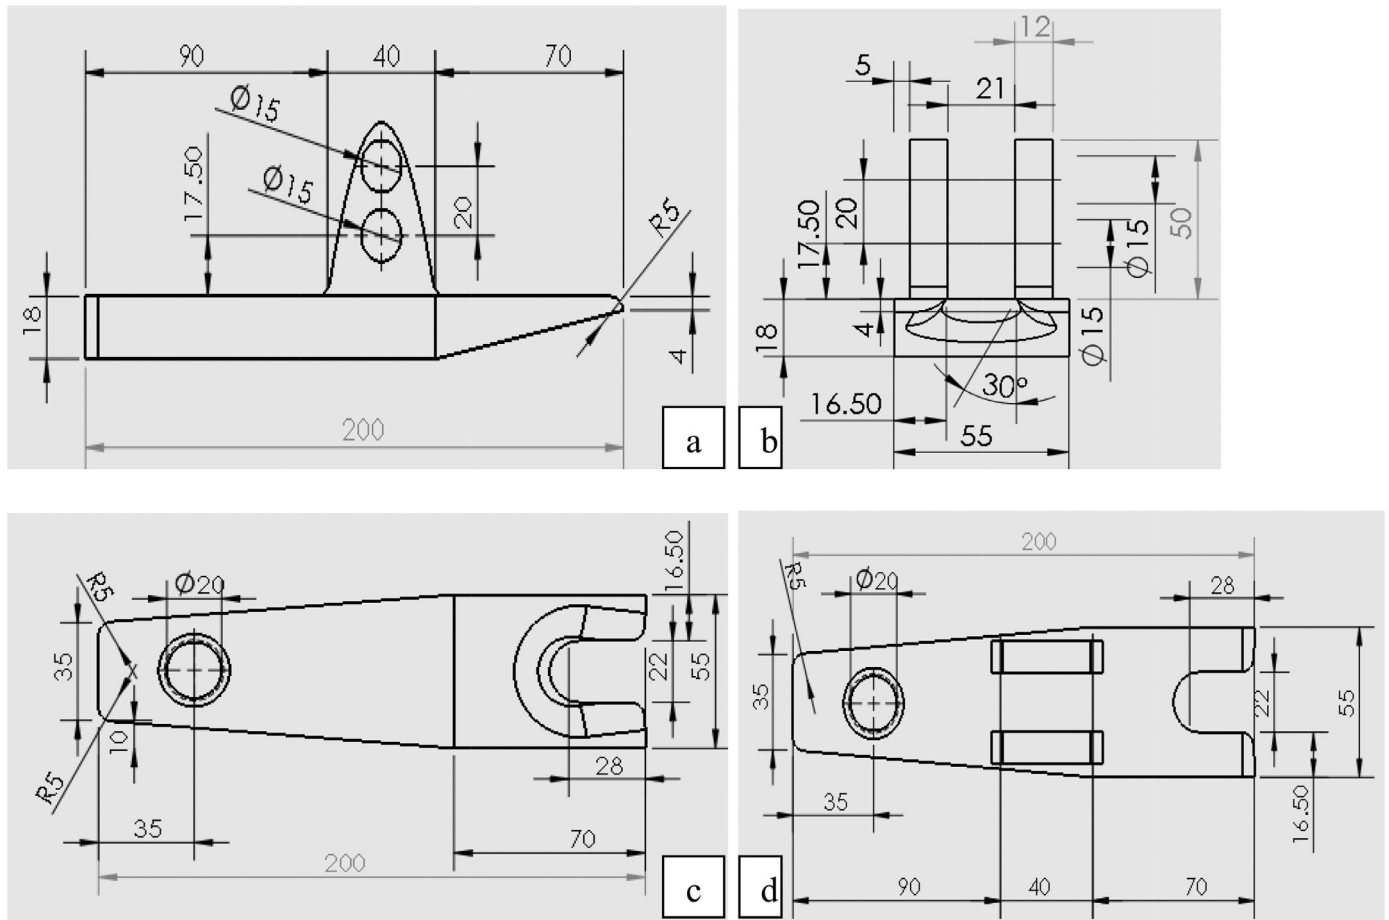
Computer Aided Design of the bottom half of the separator showing (a) front view, (b) end view (c) top view (d) bottom view.
